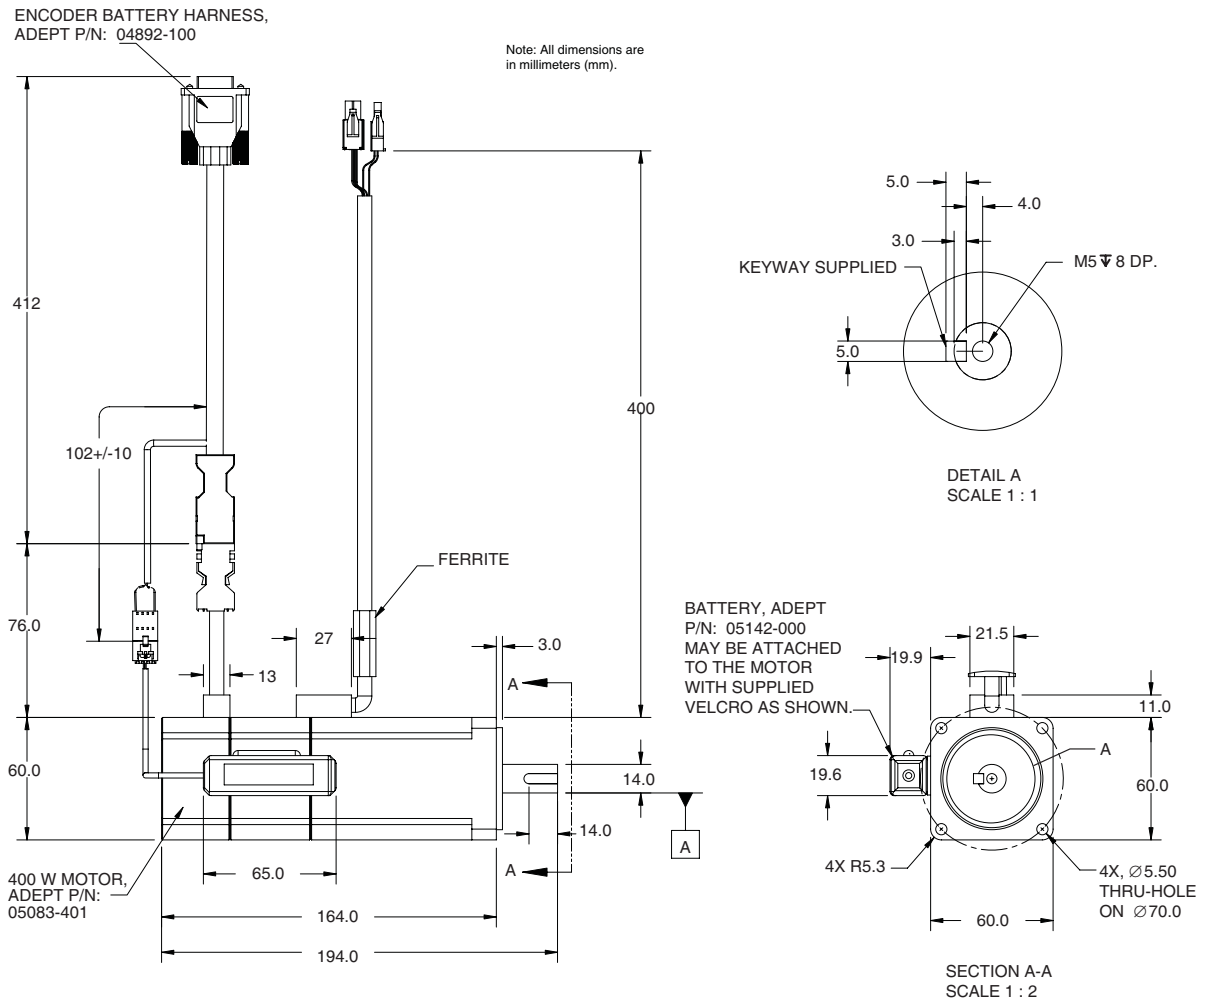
400 W Motor (with brake) Dimension Drawing
